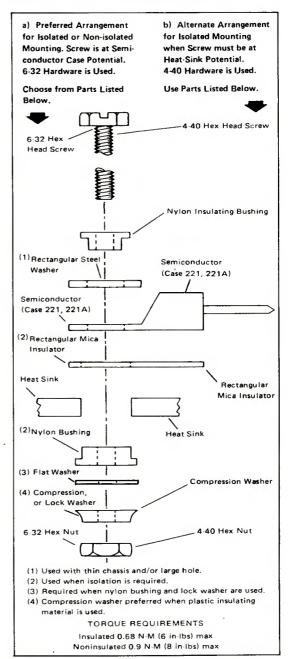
Mounting Arrangements for Thermowatt Packages
